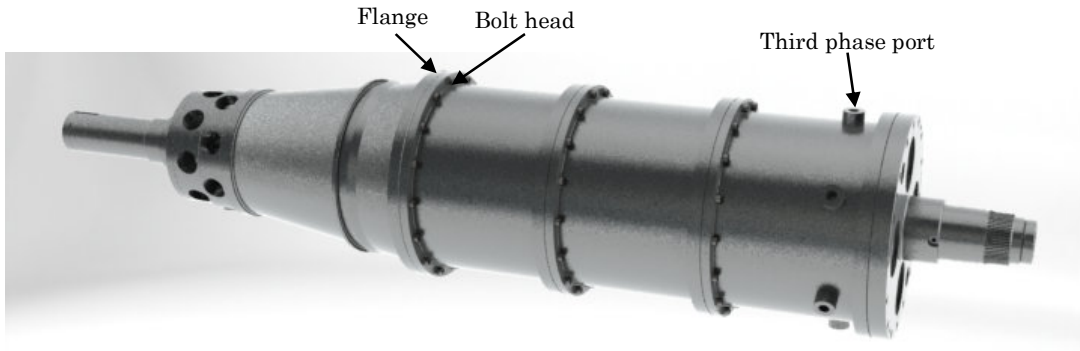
Bowl showing flanges, bolts, and third phase discharge ports
